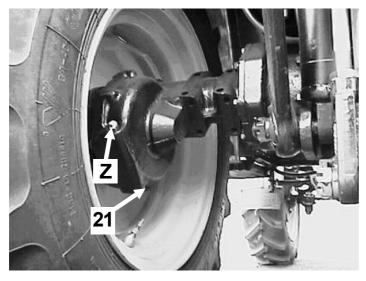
Drain plug of the rear axle spur gear drive (21), Z-stopper.
